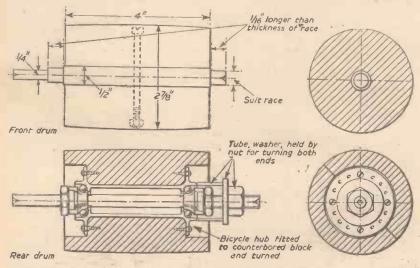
Details of the driving shaft and drum and the rear shaft and spindle.
